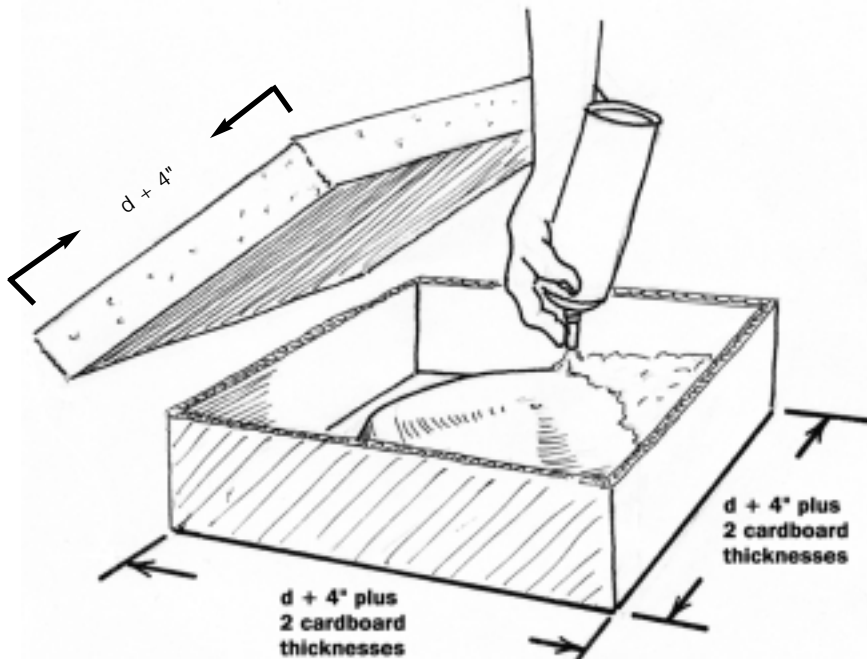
Place waxed lid (after removing lid handle) inside waxed cardboard box, cover with expanding foam insulation, then press piece of two-inch thick foam insulation into box, on top of the expanding foam. Note the dimensions.
